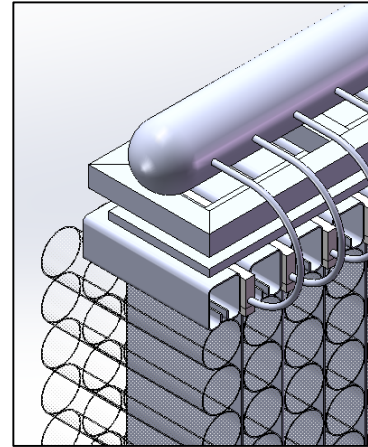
Image of the modular panel assembly, with backside fluidic connections between header blocks and manifolds.
